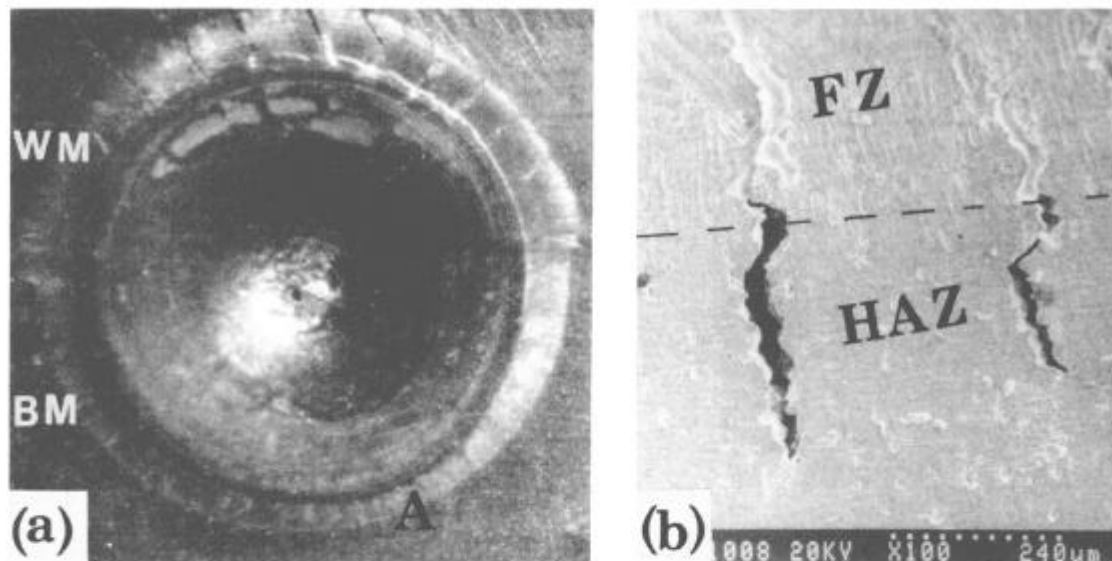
Hot cracking in the Vareststraint tested spot weld: (a) general appearance, and (b) higher magnification of area A.
